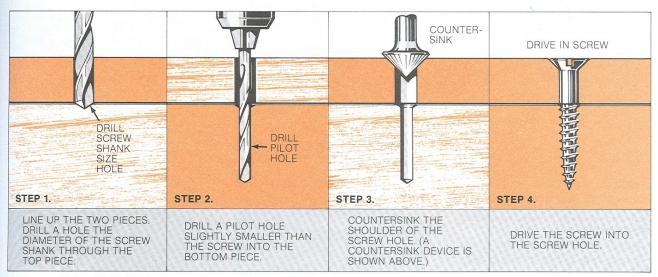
Fastening wood pieces together with wood screws. For harder woods, a pilot hole is necessary.
